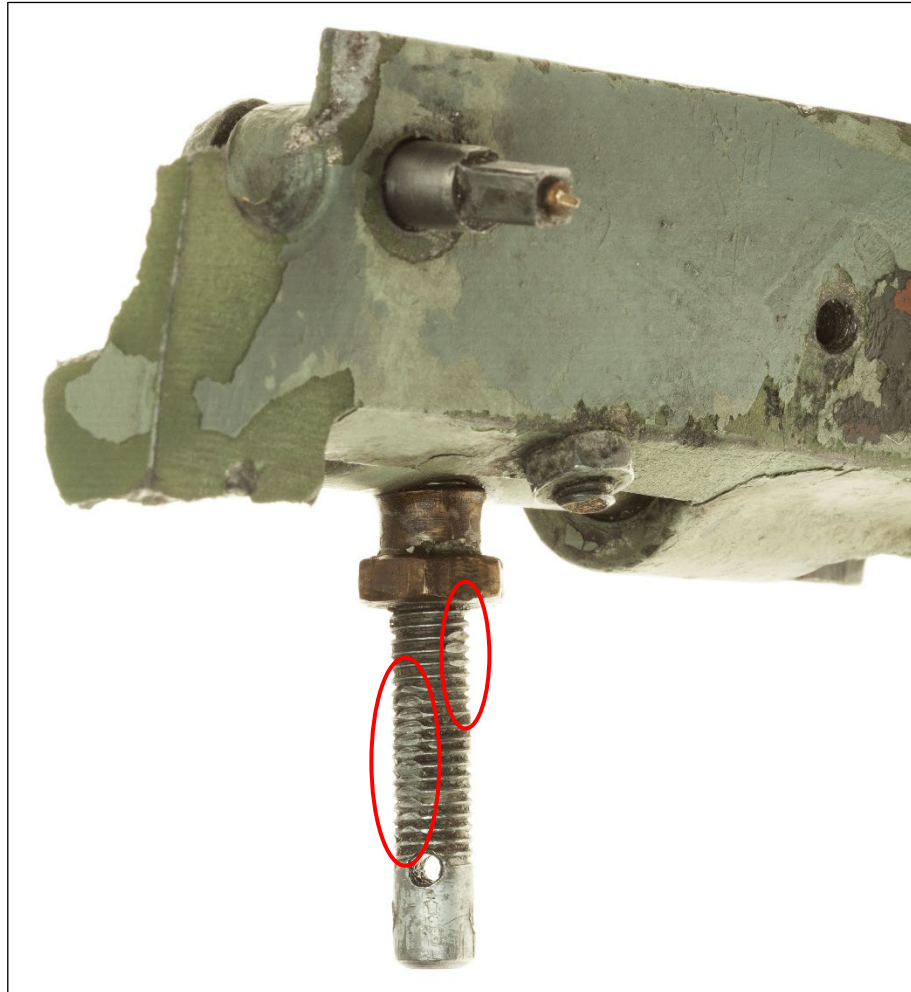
Limiting stop bolt for the left engine with damaged thread.
